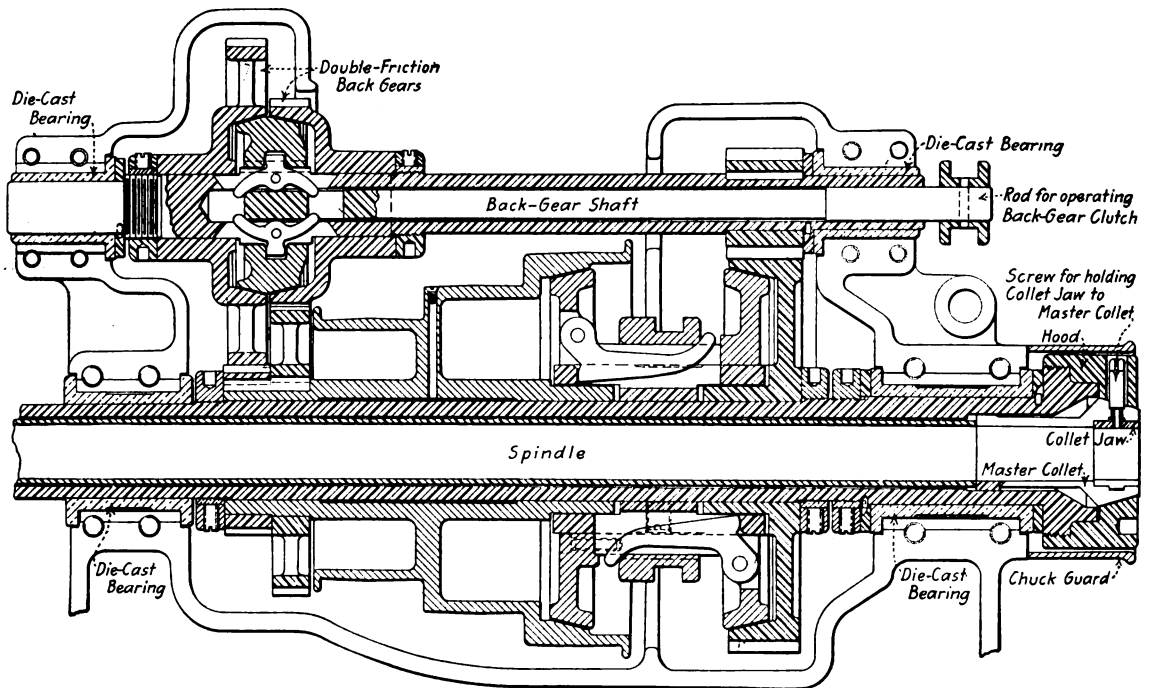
PLAN VIEW OF HEADSTOCK OF MILLHOLLAND TURRET LATHE
